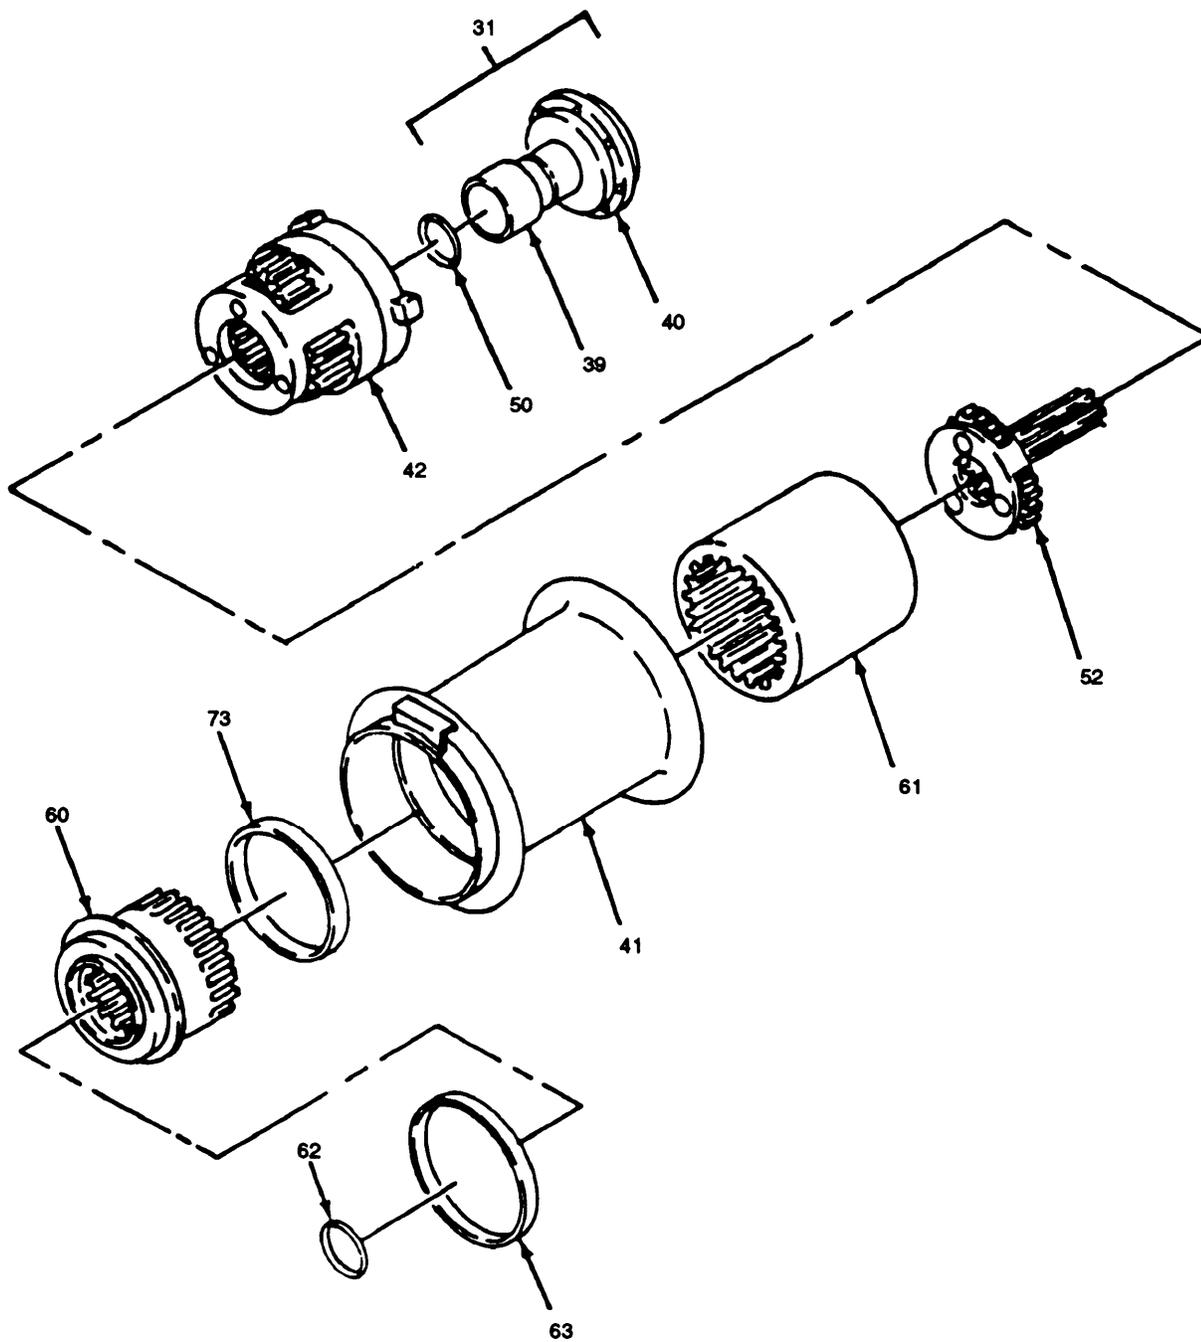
Winch Assembly Model PG-115-043R, Reassembly (Sheet 6 of 7).
